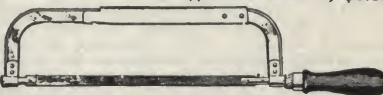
S. Adjustable frame, nickel plated, for 8, 9, 10, 11 or 12 in. blades, which may be faced 4 ways. 2  $\frac{1}{2}$  in. cut. ★ NET EACH, \$0.90
